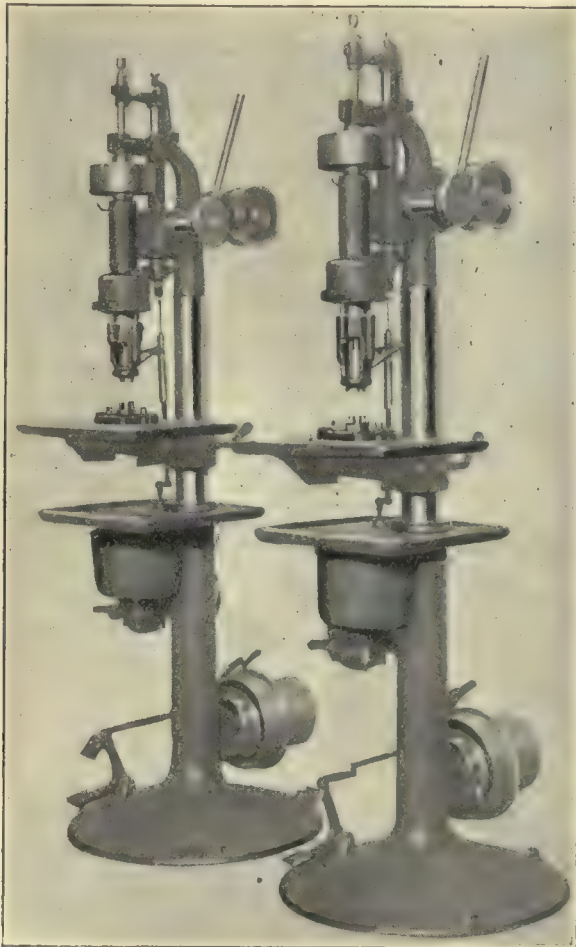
SPECIAL WRENCH HOLE DRILLING MACHINES
